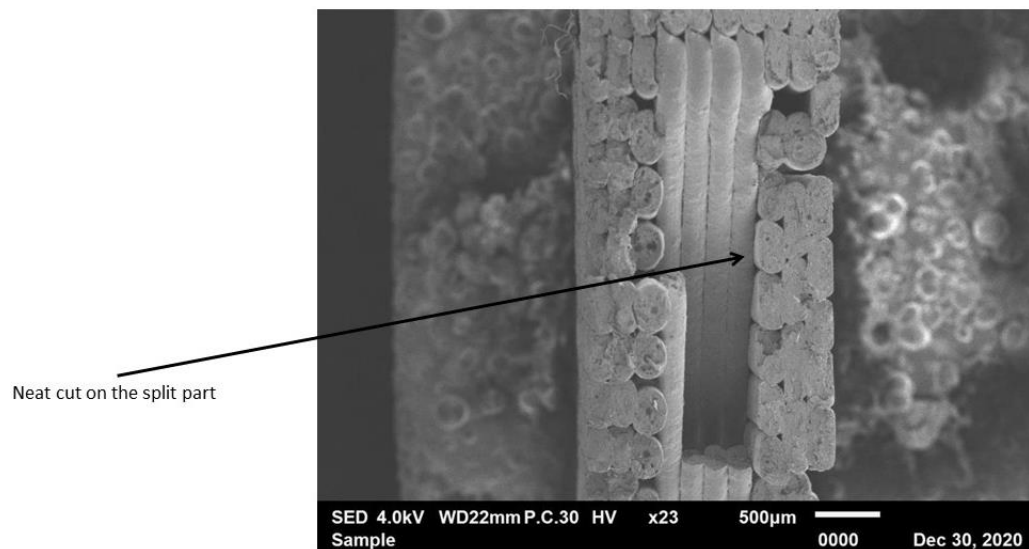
Cross-section of metal polymer composite printed part under SEM microscopy.
